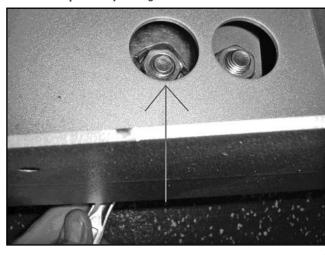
Removing bolt connecting Cylinder Mount Weldment from the Hydraulic Cylinder.
